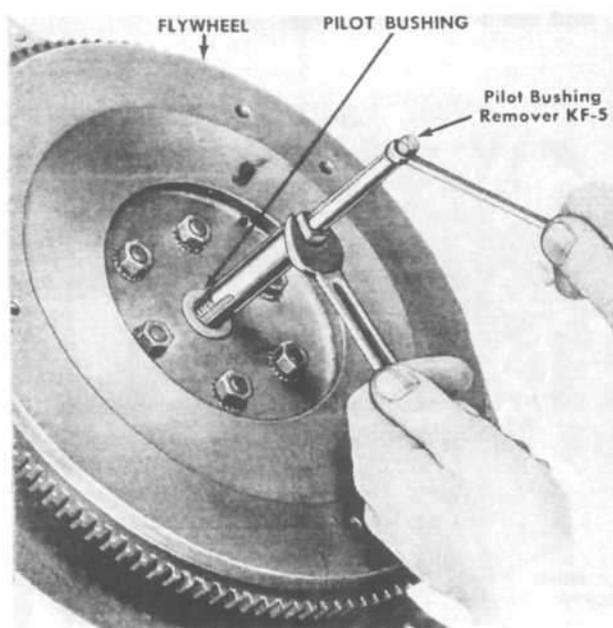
REMOVING PILOT BUSHING FROM FLYWHEEL
